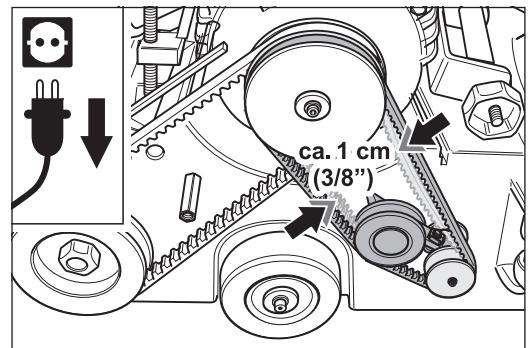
Belt tension: The slack on the V-belt should be just under one width of the V-belt.
